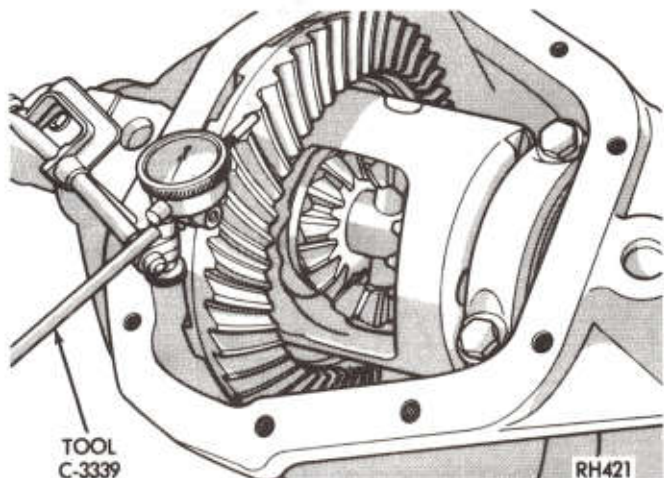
Checking Backlash Between Drive Gear and Pinion
